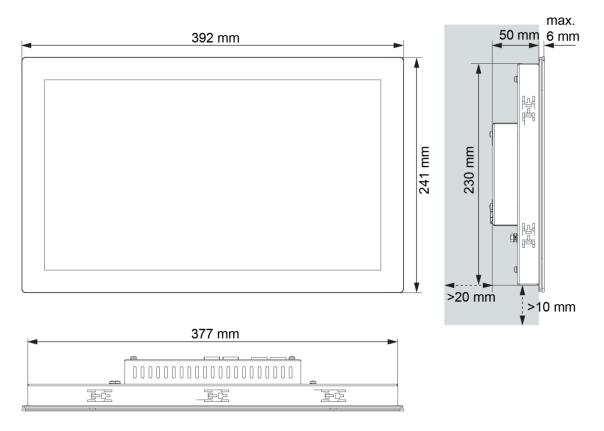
Dimensions DC2115WUX CM / ET2115WUX CS
